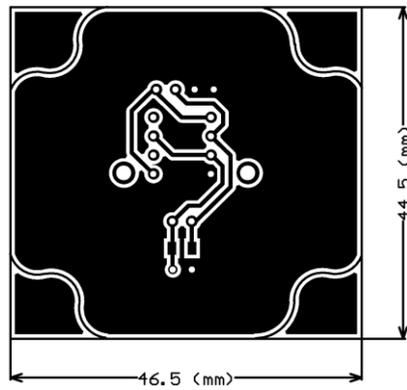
NEW SENSOR'S EXTENSION BOARD BOTTOM LAYER.
